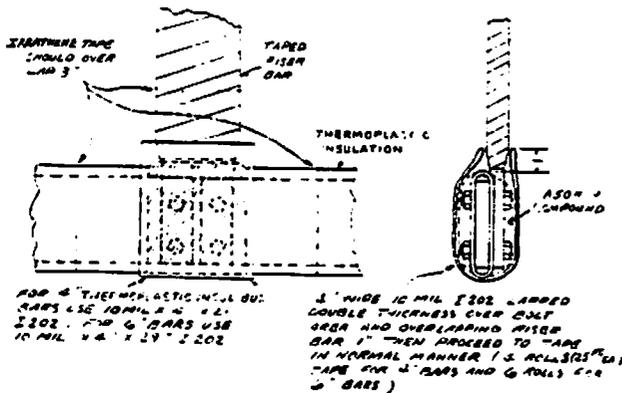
(104A2714) 13.8 KV TAPED JOINTS
